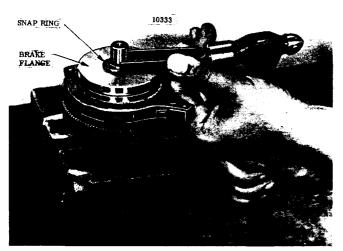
Removing Snap Ring from Load Brake Shaft.
